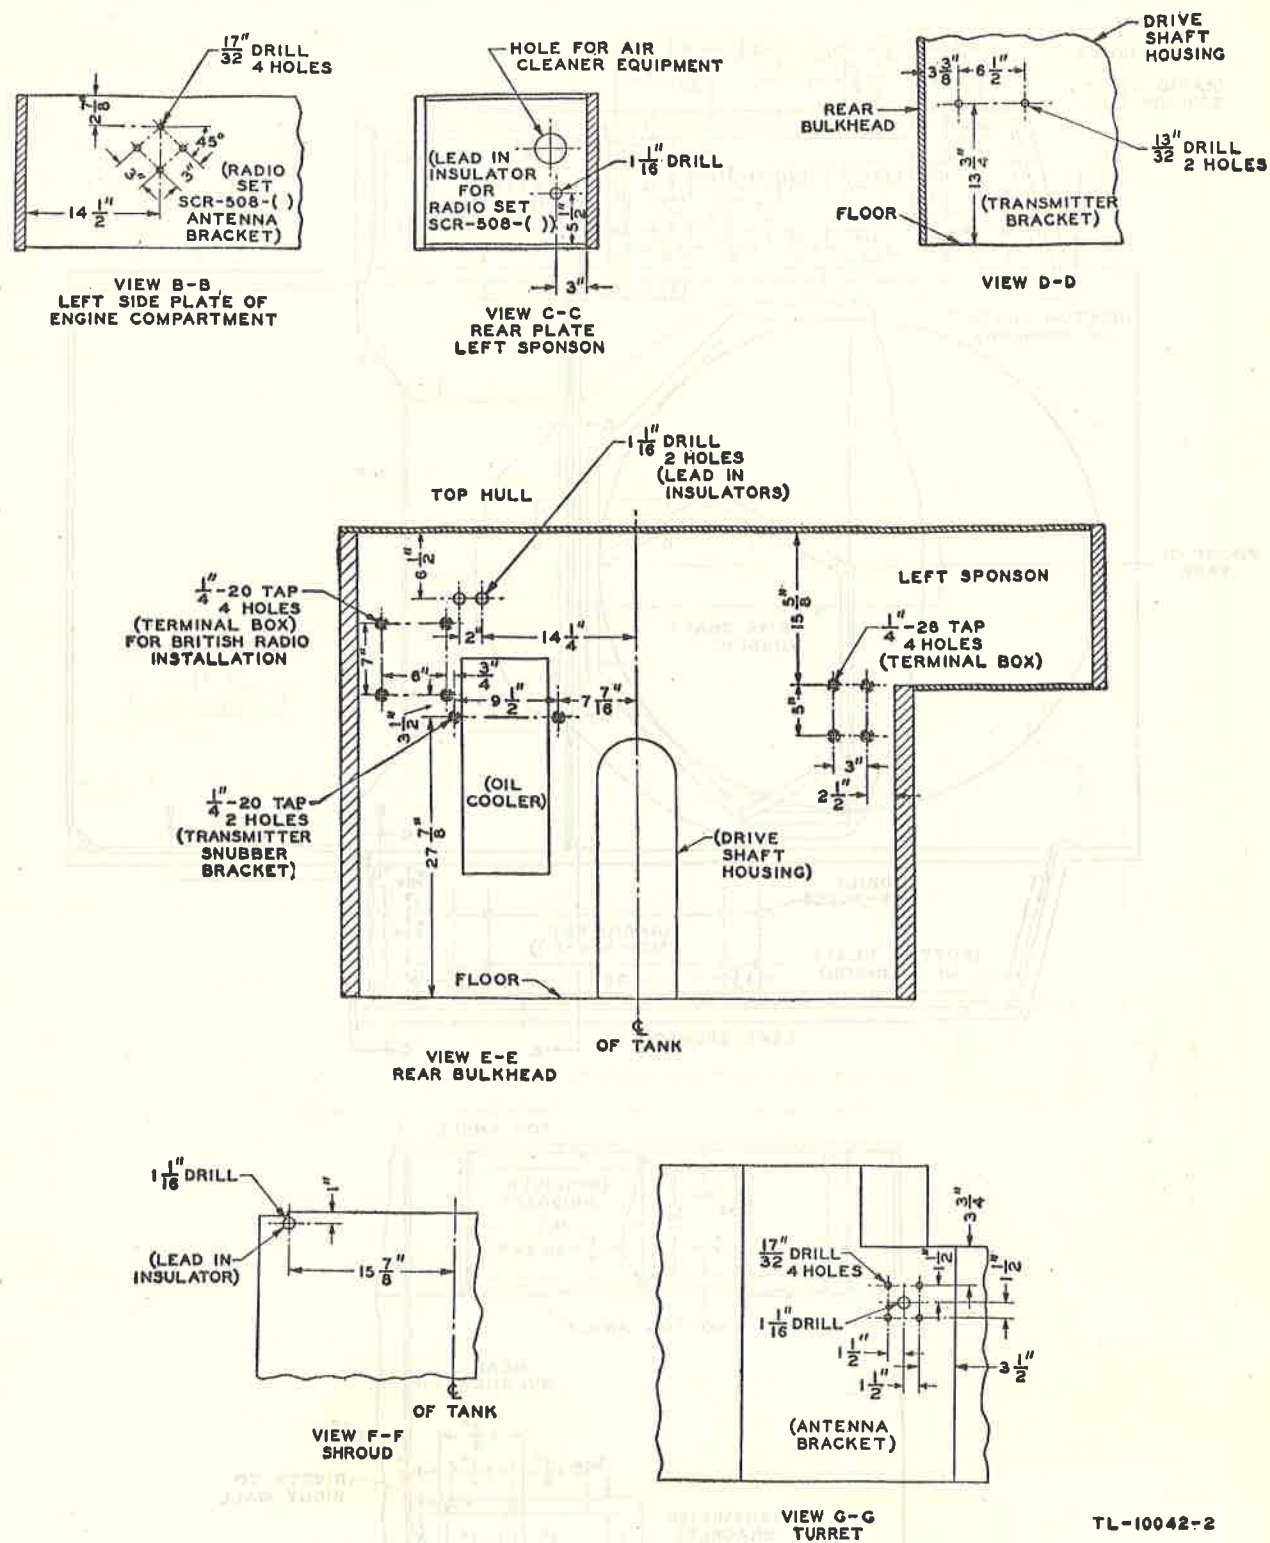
Mounting holes and location for radio equipment in Light Tank M3—Continued.
